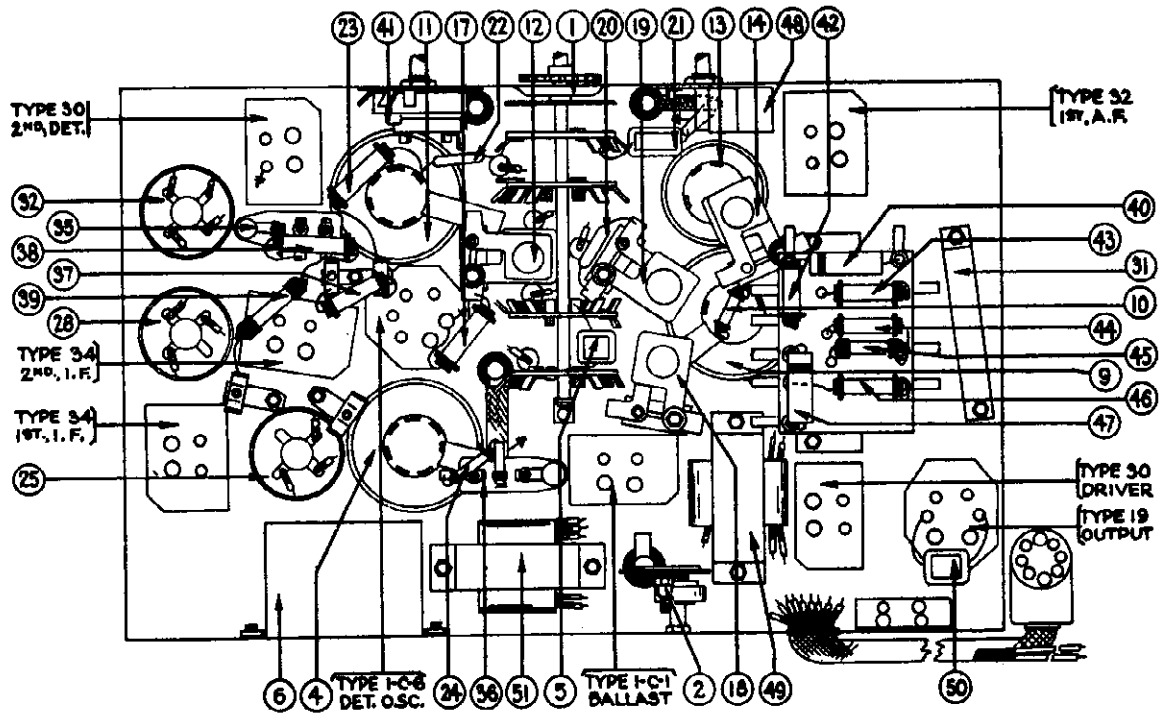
Bottom View of Chassis, Showing Parts, and Position of Compensating Condensers Reached from Below Chassis
